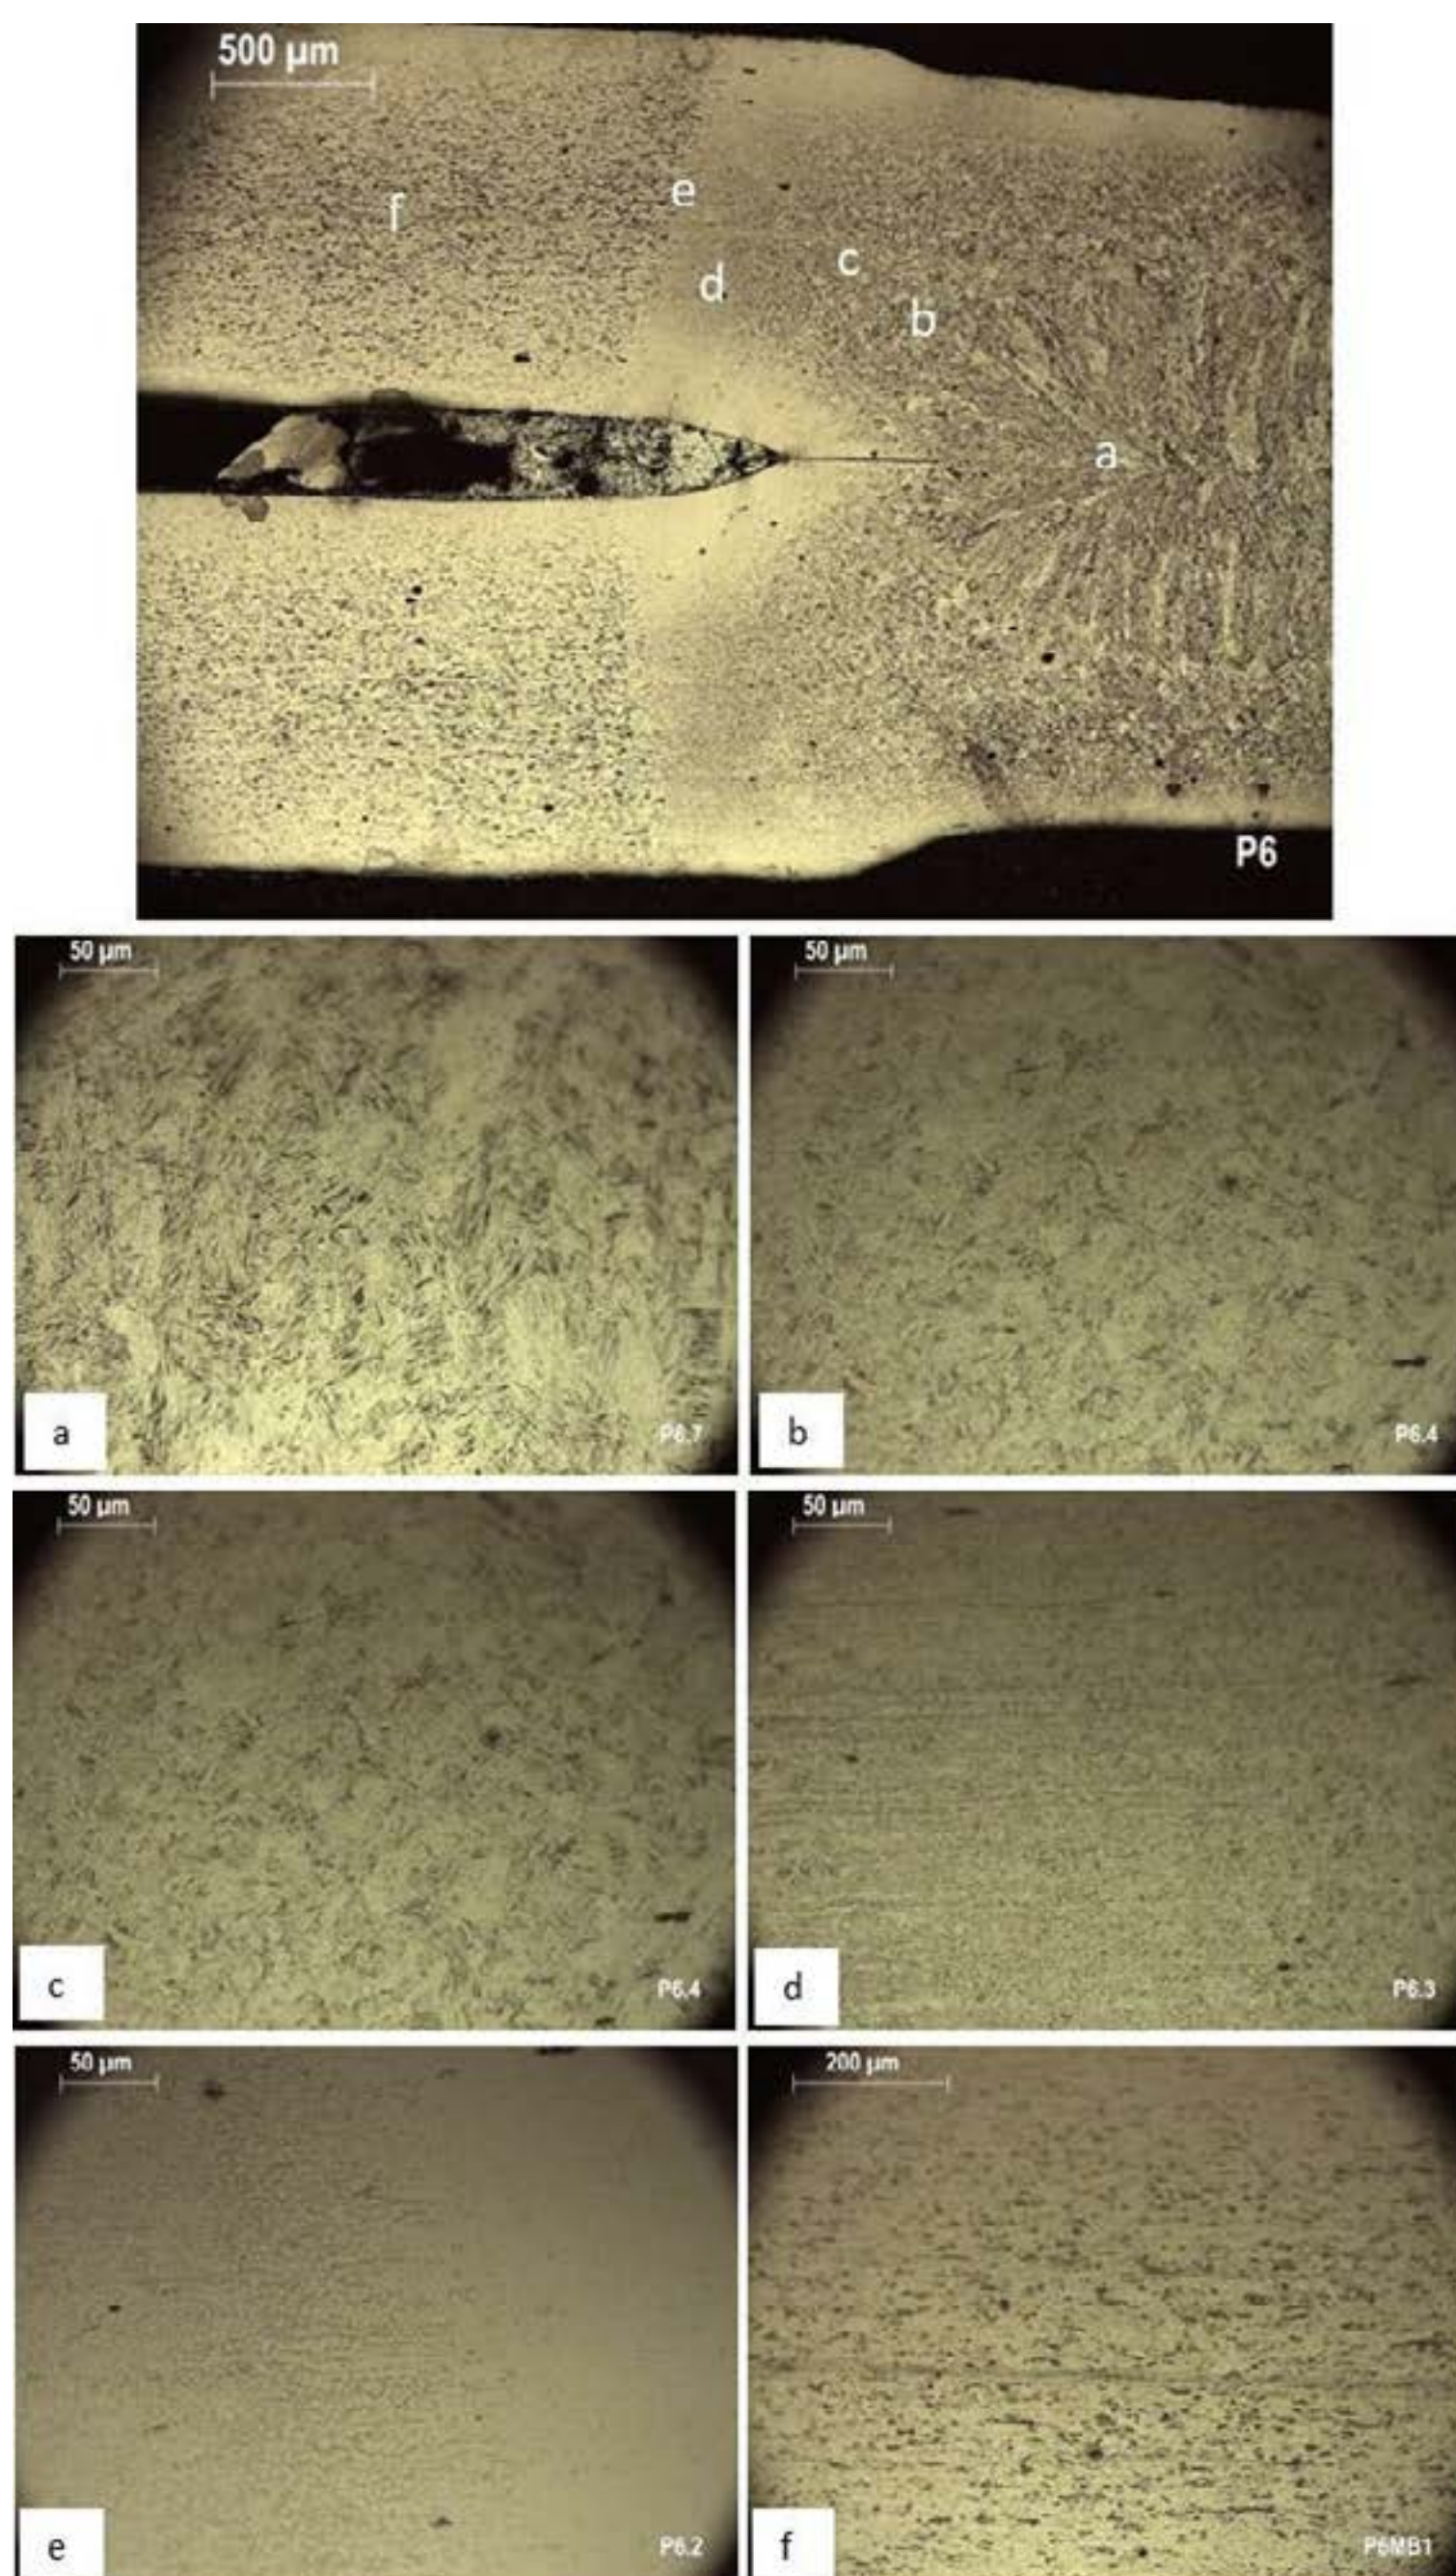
This figure shows the half cross section with different welding areas: a) FZ; b) FL; c) UCHAZ; d1) and d2) ICHAZ; e) SCHAZ and f) BM
